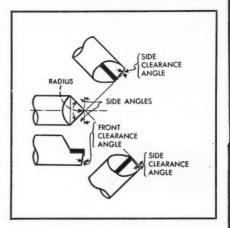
Tool drawing showing design of tool with five angles and a radius, all of which are diamond-lapped and perfectly blended in a single setting of the tool-lapping machine.
